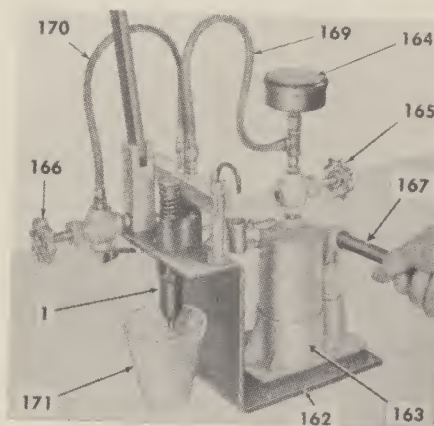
B—Test fixture set-up for testing injector valve opening pressure and valve holding pressure.
